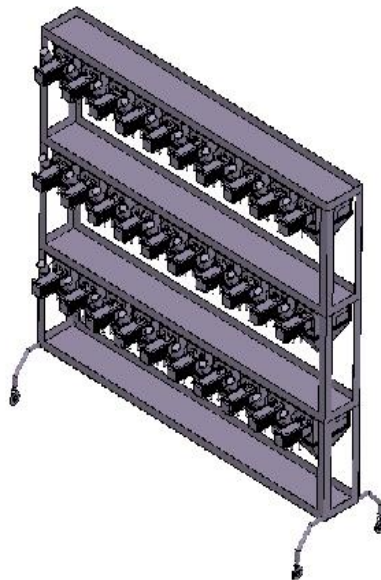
30-unit metabolic cage stand with cages. Cages are connected to a rack attached to the bottom of a horizontal plate. The horizontal plates serve as cover for the cages and as base on which urine collecting jars are arranged in alignment with the urine collecting outlets of the cages above them. The stand has wheels for mobility.
